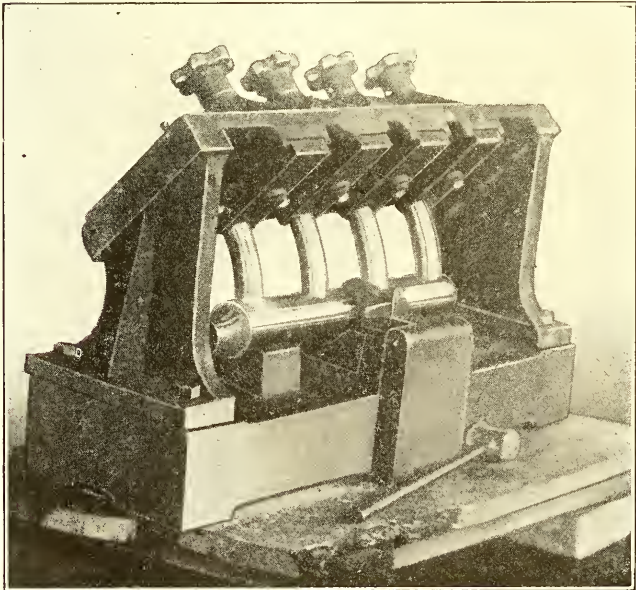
Motorcycle Manifold Welding Jig.
